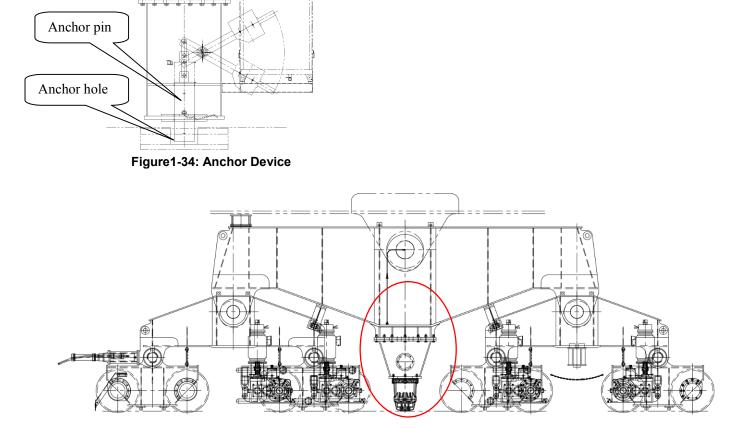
Gantry Rail Brake Located under Equalizer Beam centered
